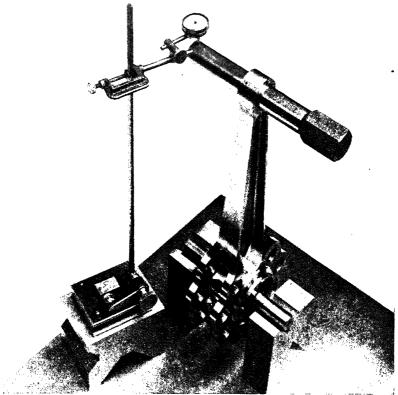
CHECKING MASTER ROD FOR PARALLELISM
